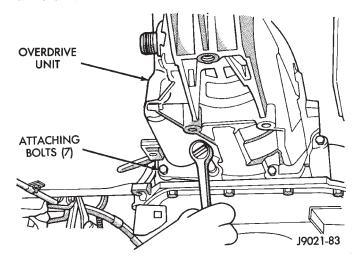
Removing/Installing Overdrive Unit Attaching Bolts
